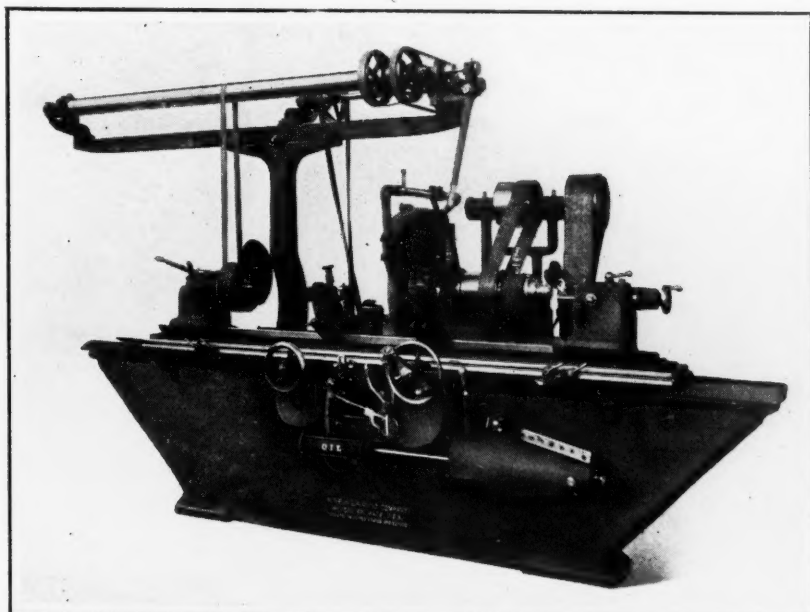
"Autopart" Regrinding Machine with a Power Table Traverse
